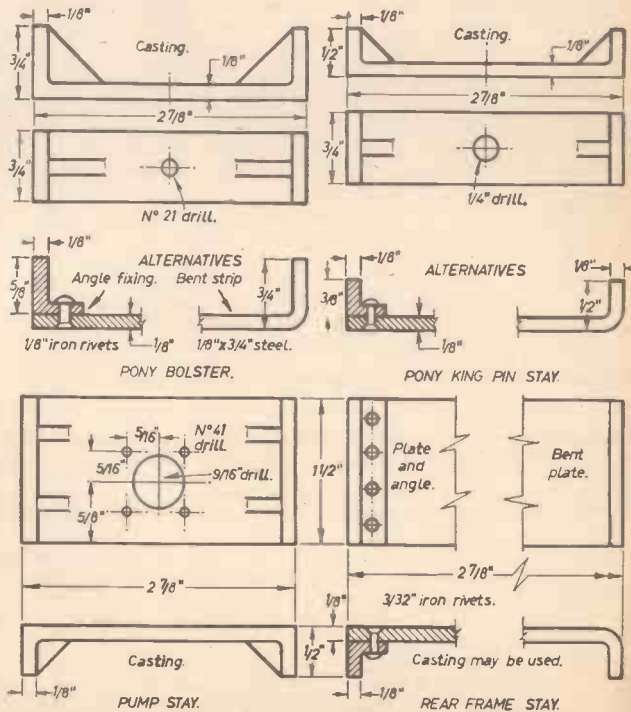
Details and dimensions of the pony bolster and king pin stay pump stay and rear stay.
